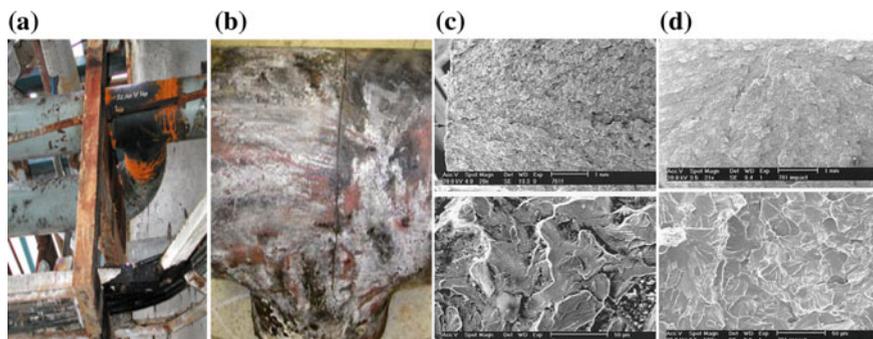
a The T-shaped pipe fitting on the support (location of failure in torch piping). b The cracked T-shaped pipe fitting. c The fracture surface after the opening of the crack (inner surface of the fitting). d The fracture surface of the impact specimen (taken from the same pipe) after the Charpy test
